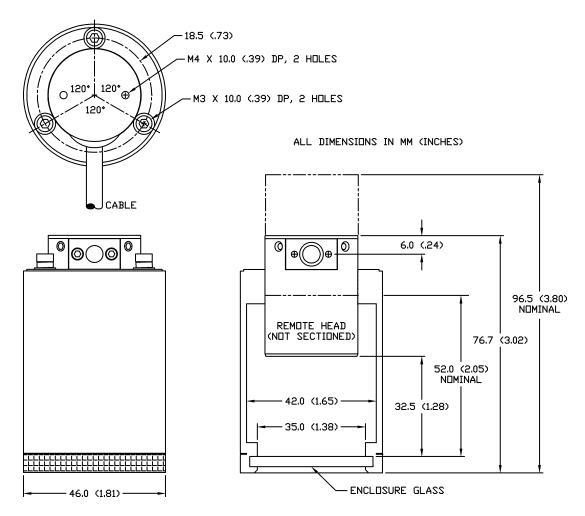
Dimensions, In-Sight 4100 Remote Head Camera with Enclosure
